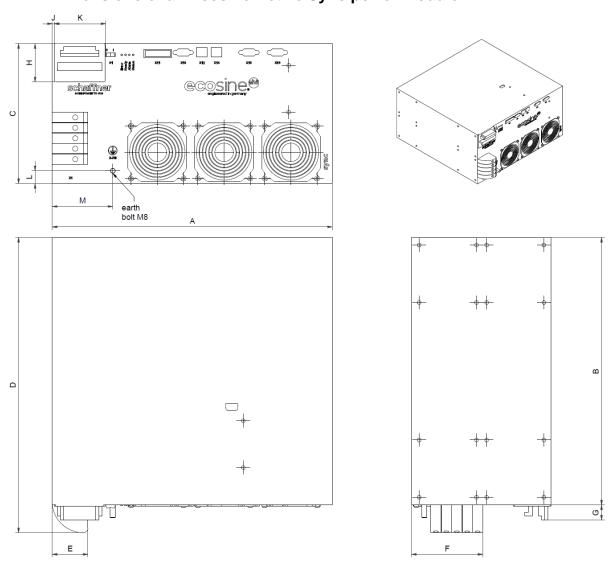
mechanical drawing of Ecosine Active Sync power module (see dimensions in Table 6 and Table 7 below)
